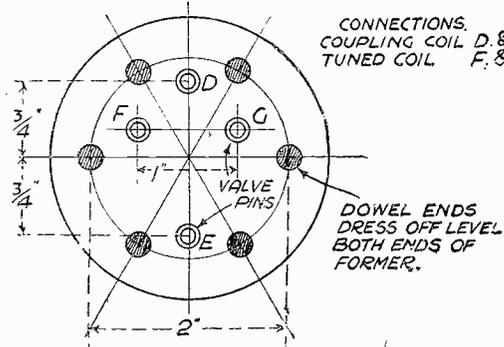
shows how the coil mounting base of four and six-pin coils may be utilized as a former on which to
